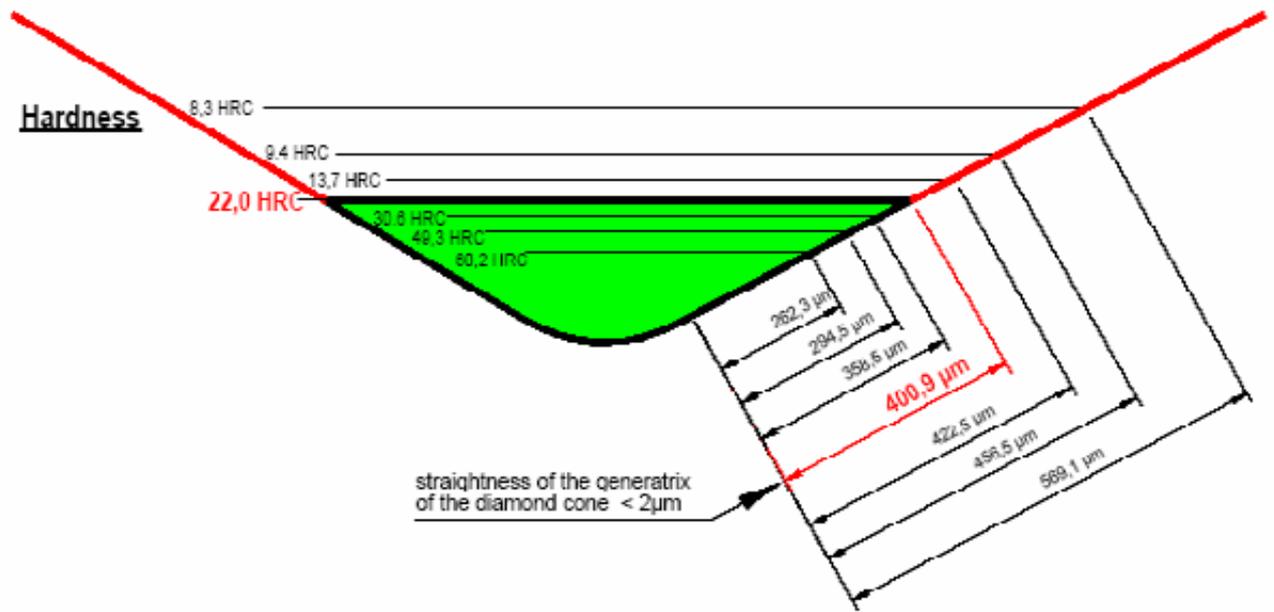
Necessary machined conical surface of a Rockwell-diamond-indenter in dependence of the penetration
